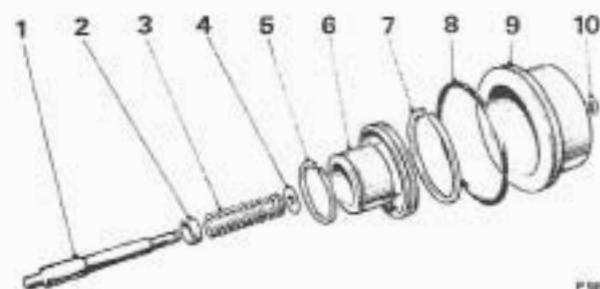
REAR SERVO AND ACCUMULATOR—EXPLODED
